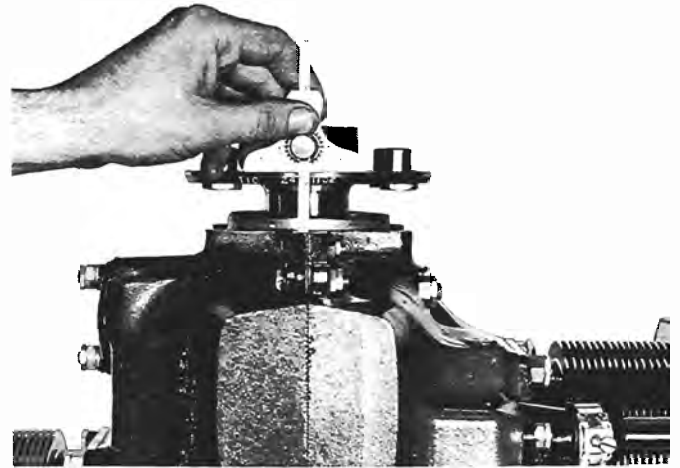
Placing Flange Crankshaft in Firing Position of No. 1 Piston.
